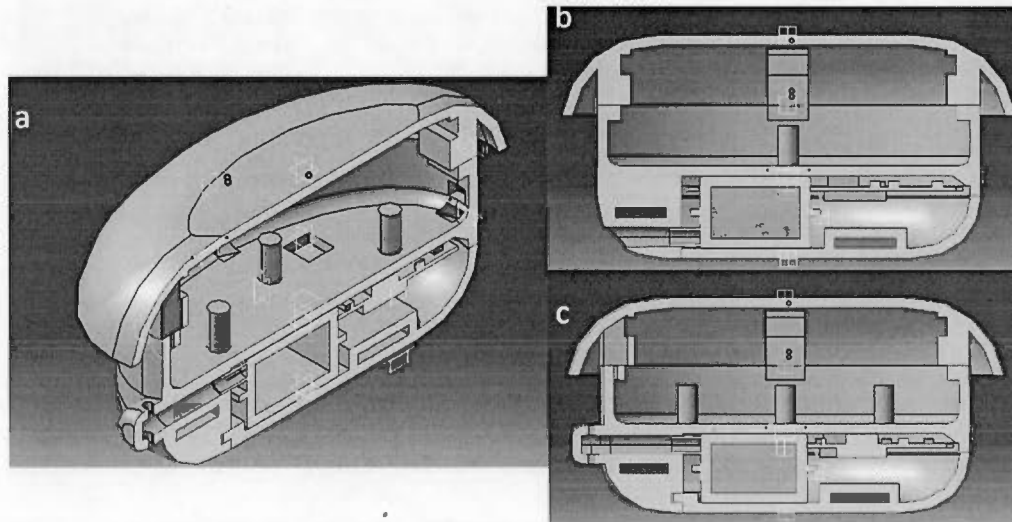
Modified PAS parts installation sequence. (a) Side view. (b) Back view including pressure holes. (c) 3D view
